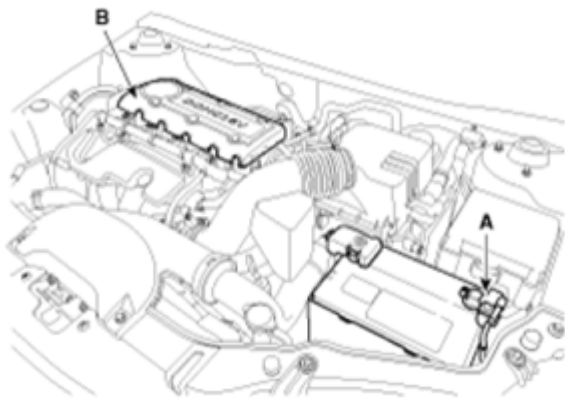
Identifying Engine Cover & Battery Negative Cable
